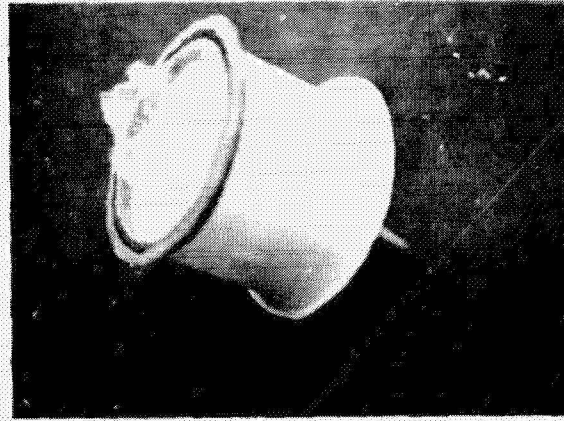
Facesheet Bond Test Specimen After Facesheet Rupture
